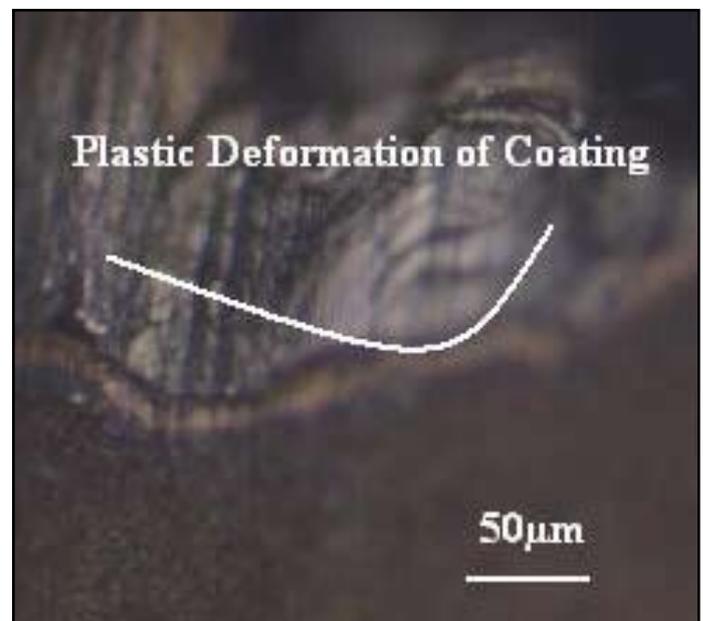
The Cutting Insert After 2minutes of Machining at  $v=130\text{m/min}$ ,  $f=.24\text{mm/rev}$  and  $W.H.=45\text{HRc}$ .
